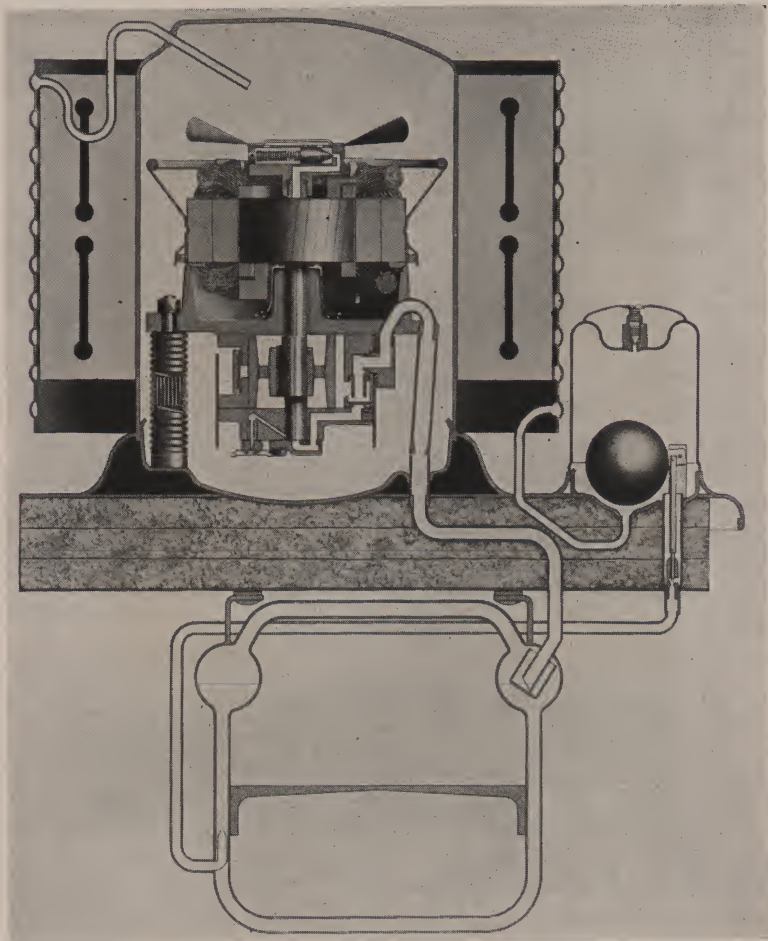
CUTAWAY SECTION G. E. H-T-70 REFRIGERATING UNIT.
